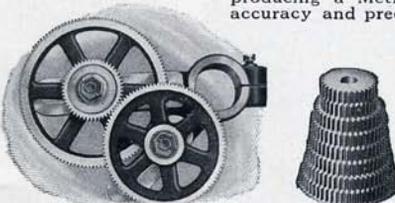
Transposing Gears and Bracket, Also Additional Change Gears
